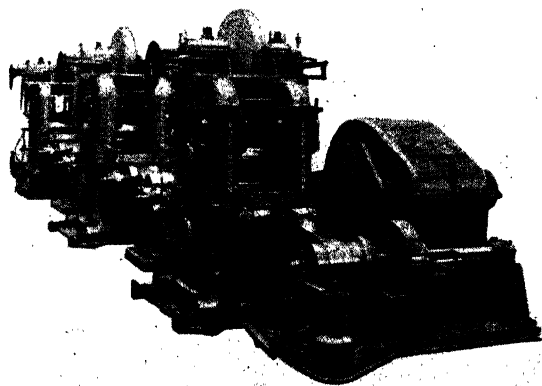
Continuous Three-Stand Four-High Rolling Strip Mill. Finishing speed 350/700 f.p.m.
